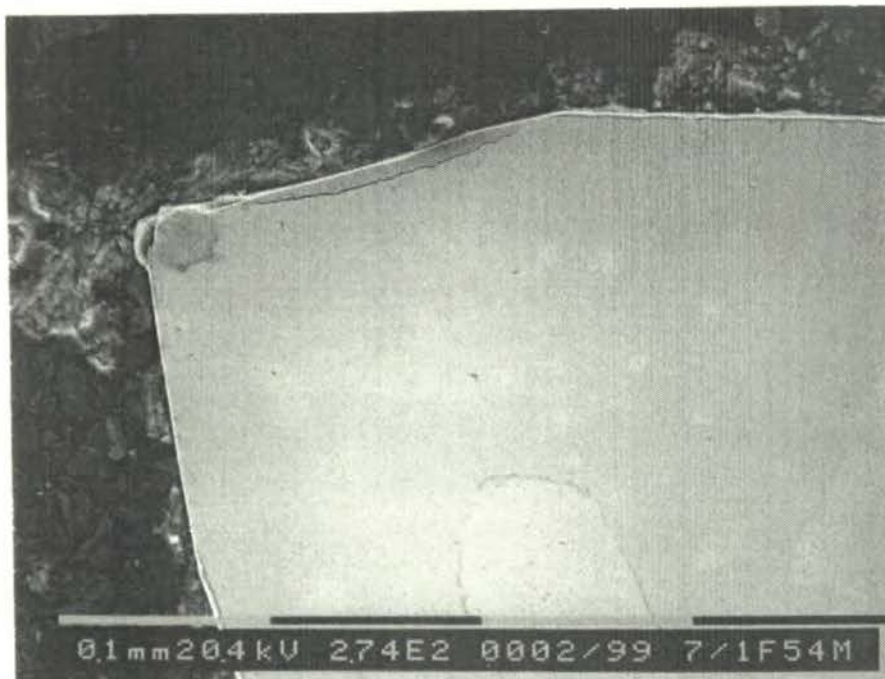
33 Sectioned KC994M tool showing adhered workpiece on the rake and a smoothly worn region on the flank face; after machining Inconel 718 for 54 minutes at 25 m/min and 0.08 mm/tooth
